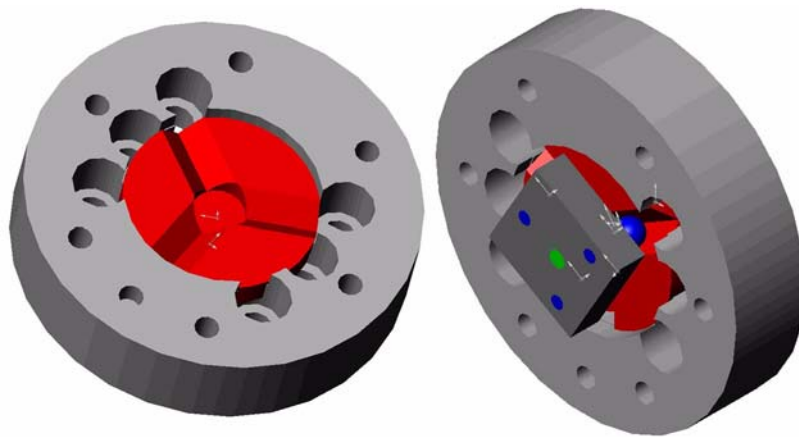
Insert Plate in Flange, Sensor Unit on Insert Plate
